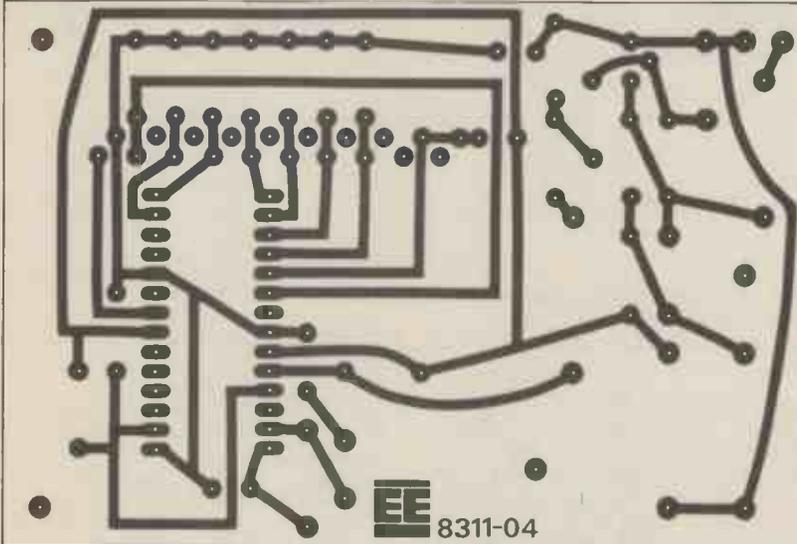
Full size printed circuit board master. This board is available from *EE PCB Service*, Order code 8311-04.
